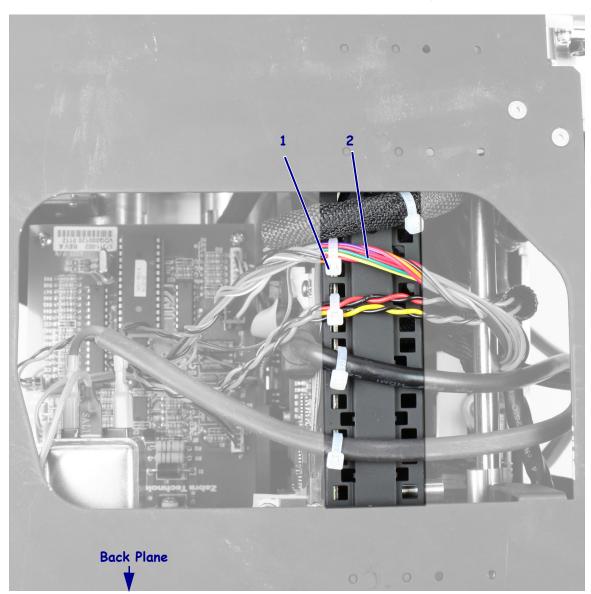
• Bottom Chassis Rail (View from Under the Print Engine)
